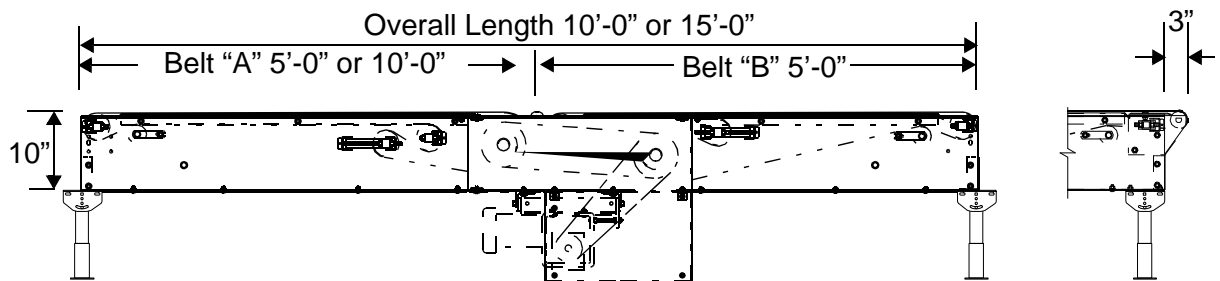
10' Brake/Meter Belt (Knife Edge Pulley Shown at Right)
